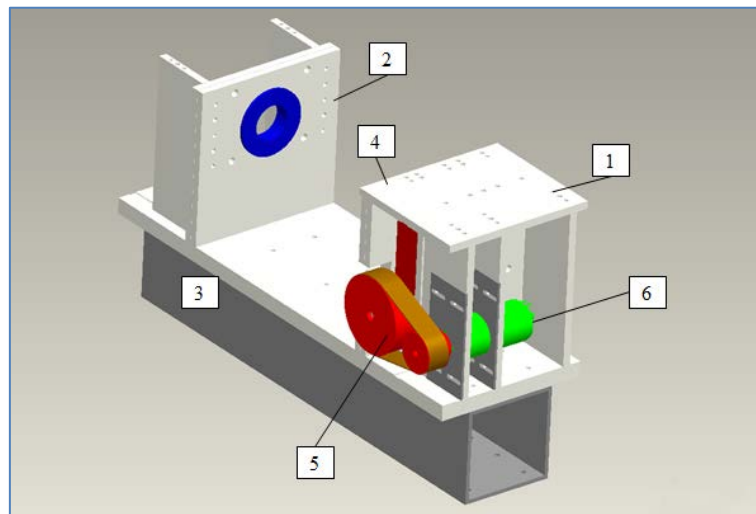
Chassis. 1. Housing for roll drive mechanism. 2. Yaw cradle support (non- drive side). 3. Chassis stiffening beam. 4. Roll output shaft (Hidden behind housing). 5. Reduction belt and pulley. 6. Worm gearbox
